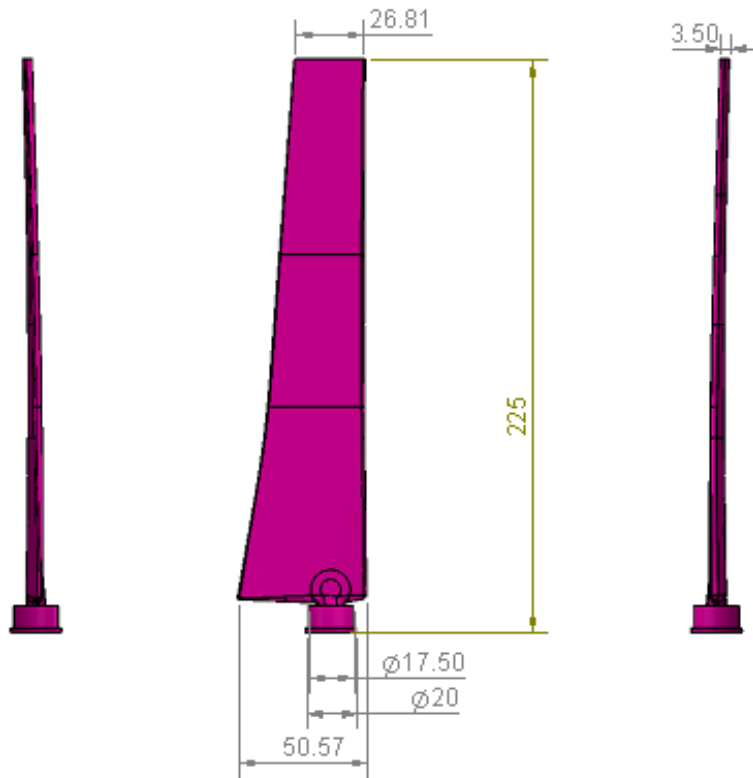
Typical Fan blade section and plan details (Actual dimension can be collected from Mr. Sharad Saxena, Email: saxenas@iitk.ac.in)
